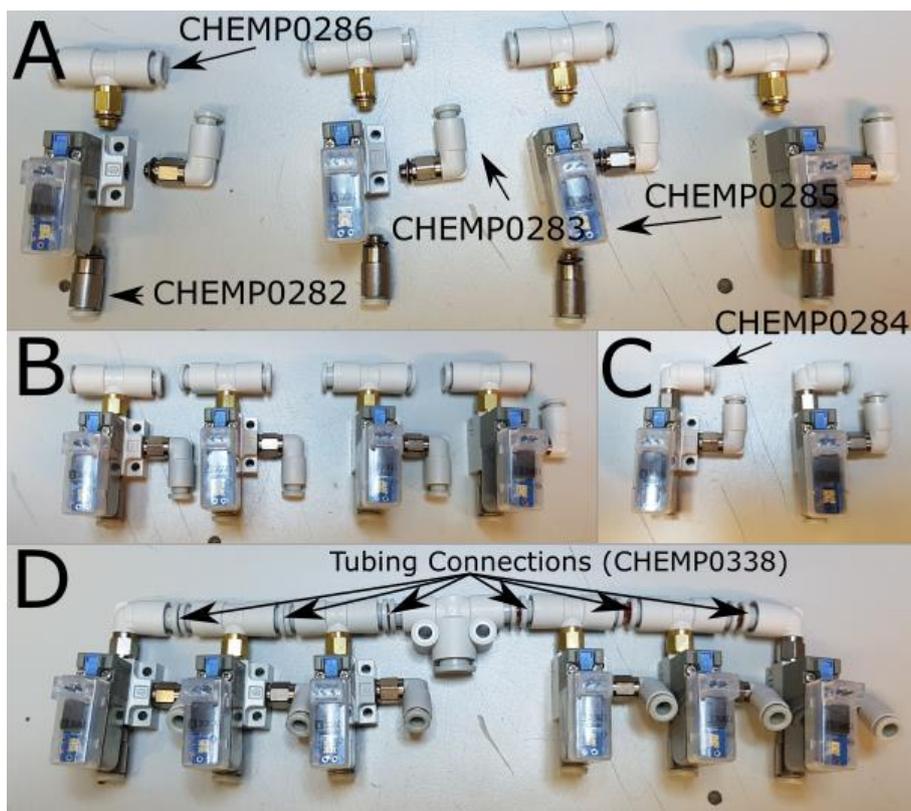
Assembly of the frontend valve manifold: A) source parts for the four central valves, B) the four central valves assembled, C) all six fully assembled valves and D) the finished frontend valve manifold.
